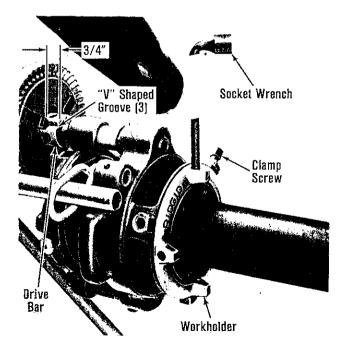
Tightening Workholder on No. 141 Geared Threader.
